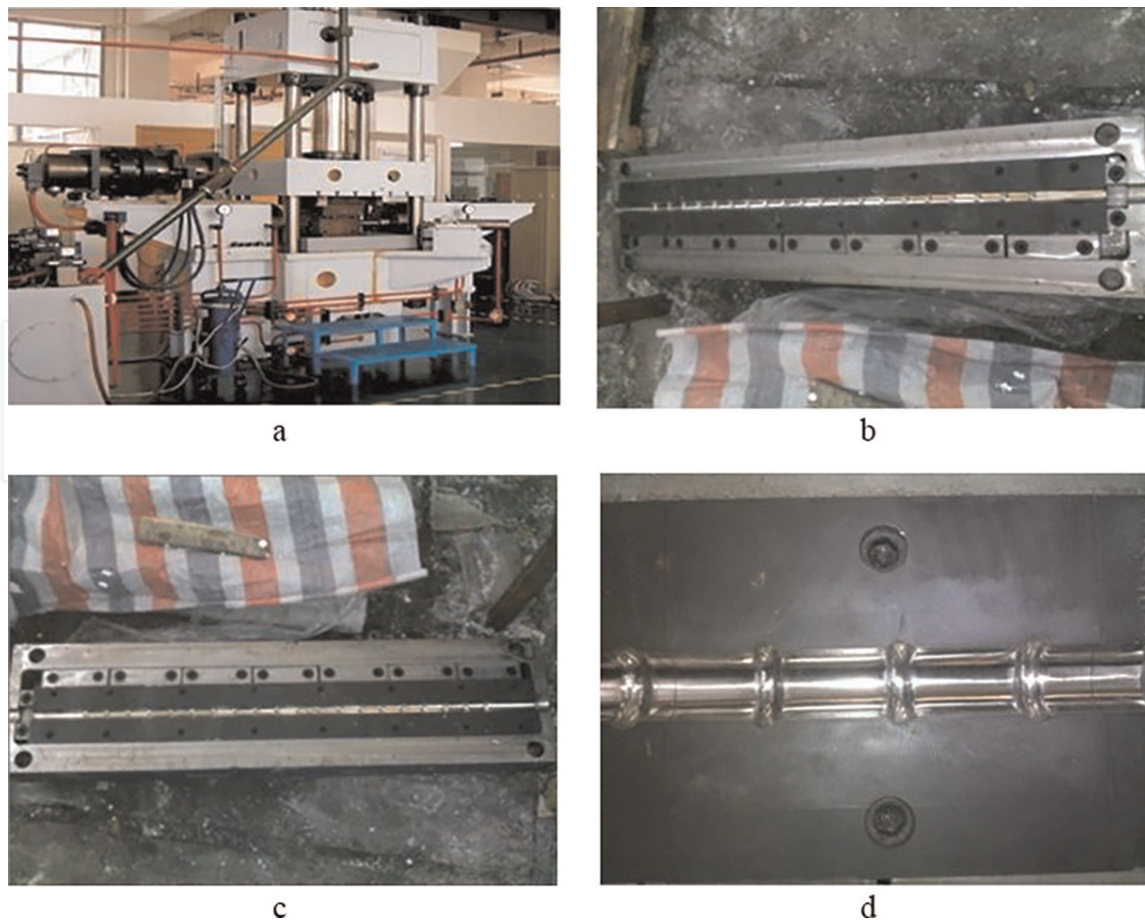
The hydraulic bulging machine and mold. Based on the modified order as the above sticky. (a) Hydraulic bulging equipment; (b) upper module; (c) lower module; (d) inner mosaic block.
